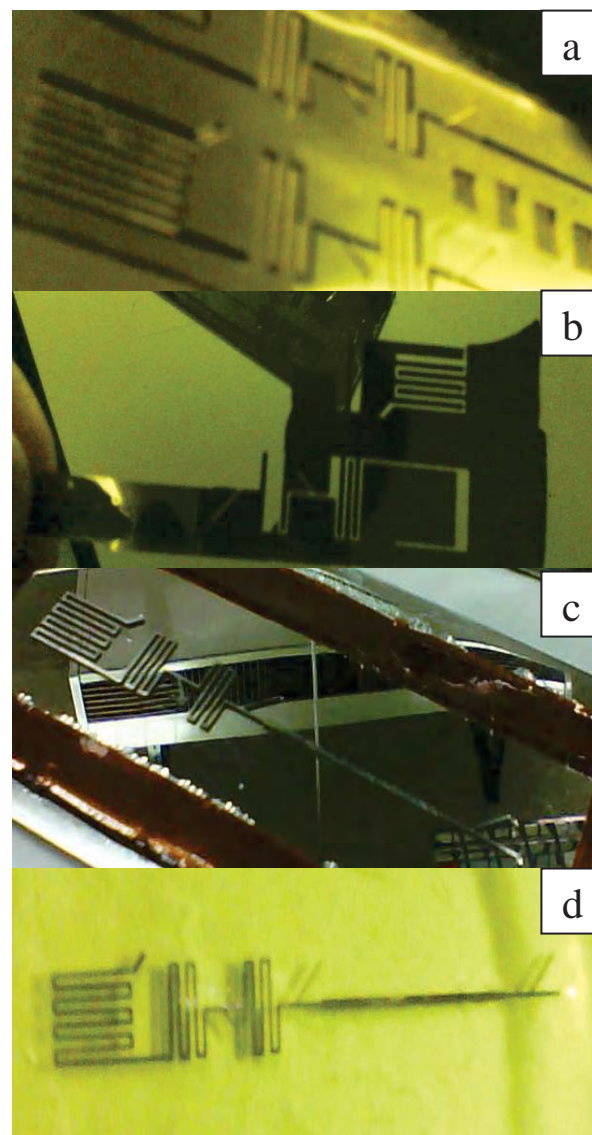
Ni-Stainless steel mold fabrication: (a) S-T raw mold, (b) detached S-T raw mold, (c) completed Ni-Stainless steel mold, and (d) detached Ni microchannels.
